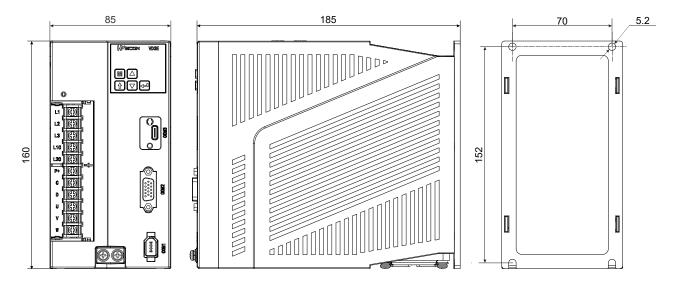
Installation Dimensions of VD3E Type B Servo drive
